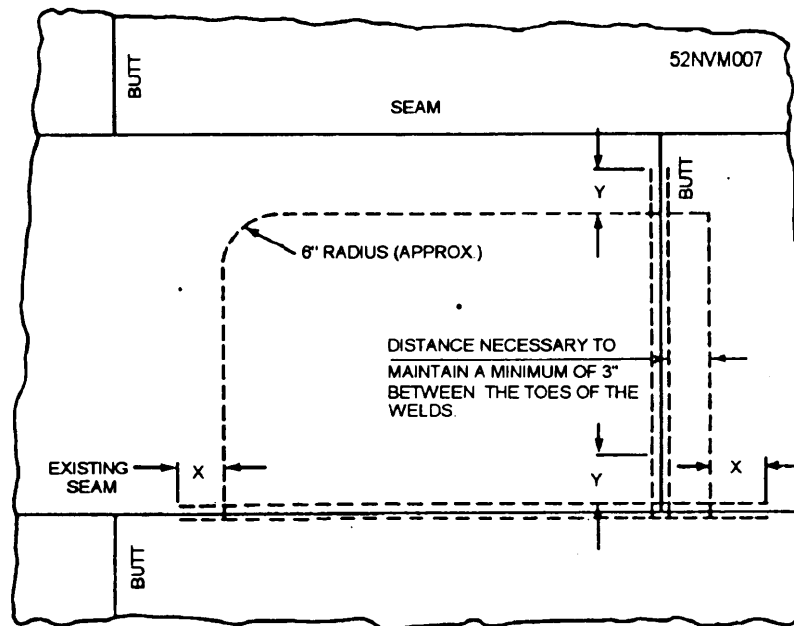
New inserts or patches crossing existing butt welds.
